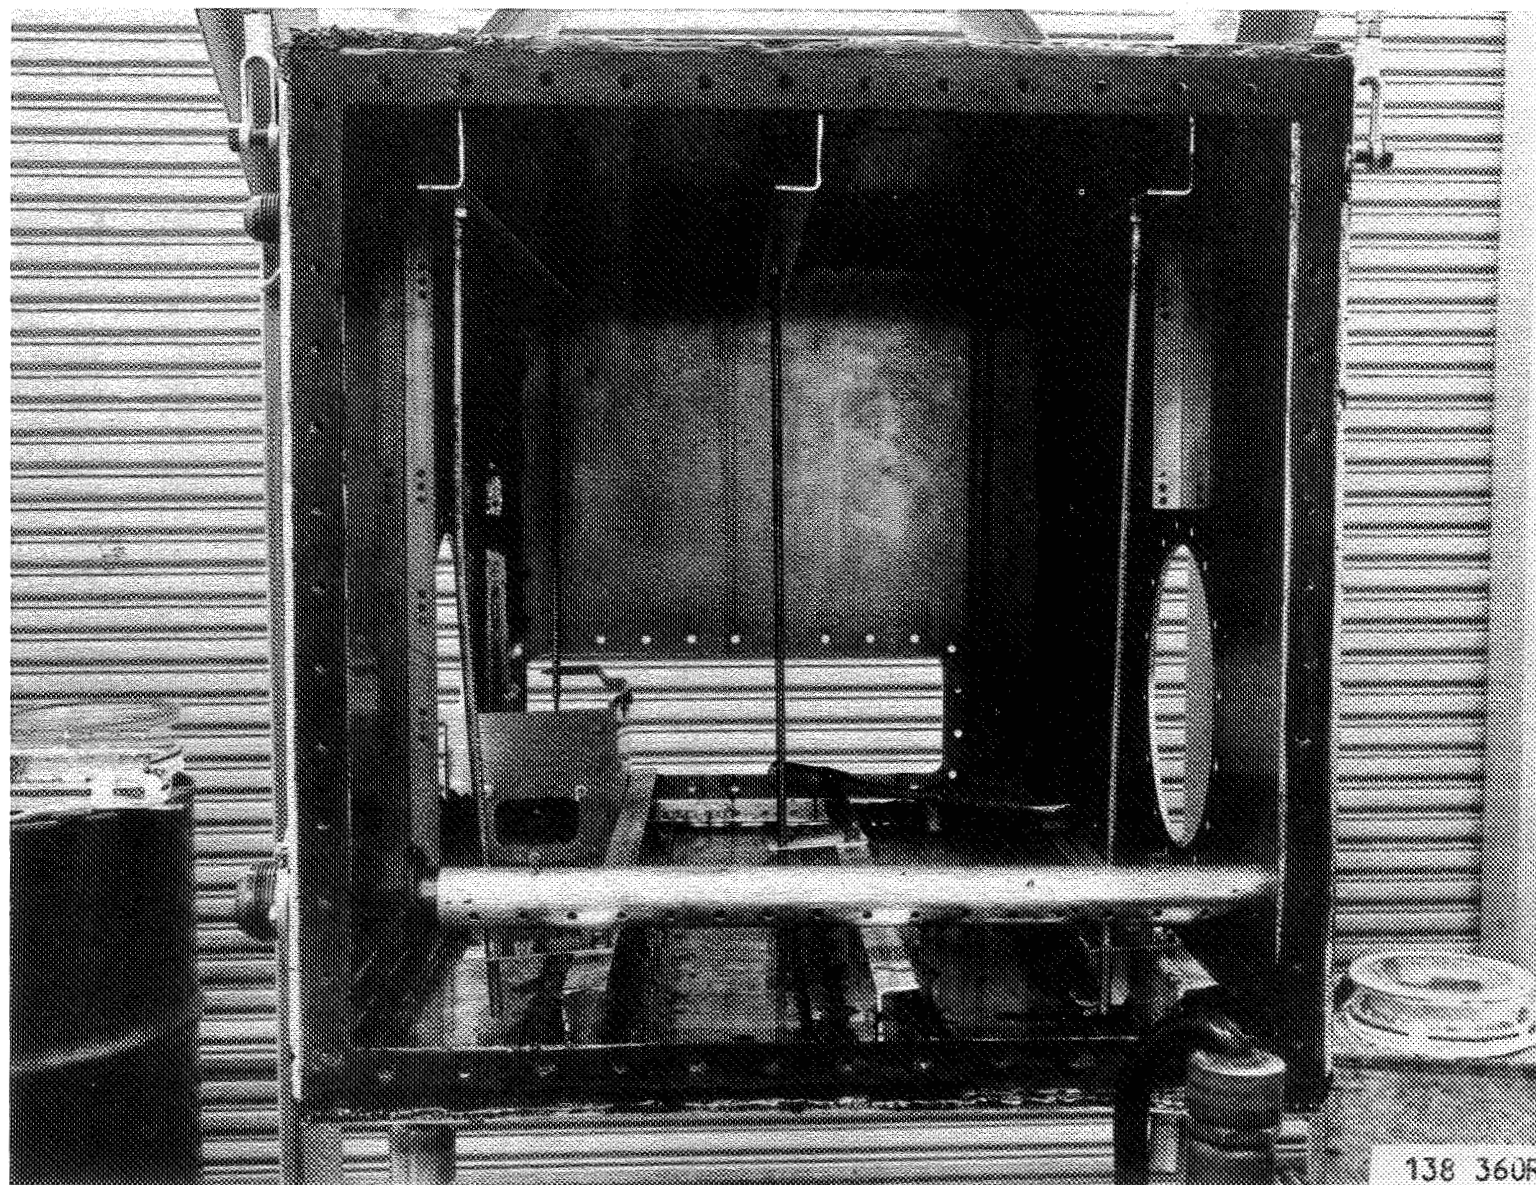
TEST TANK DURING FINAL ASSEMBLY,
